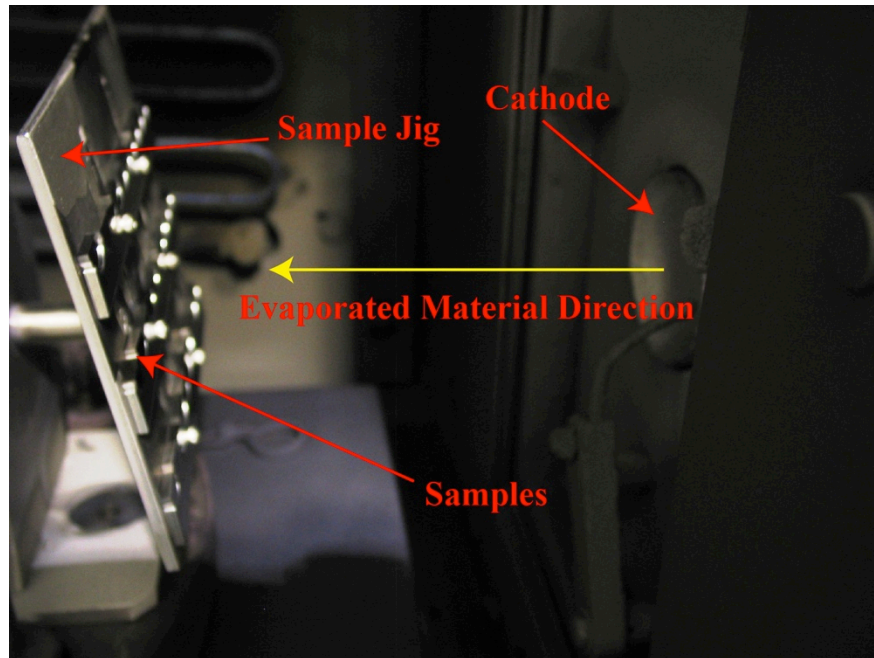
Jig inside the vacuum chamber of the CAD equipment.
